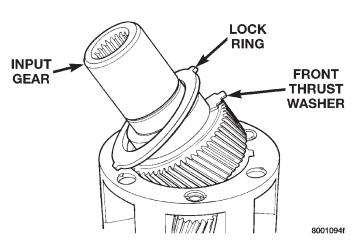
Input Gear, Carrier Lock Ring, And Rear thrust Washer Removal
